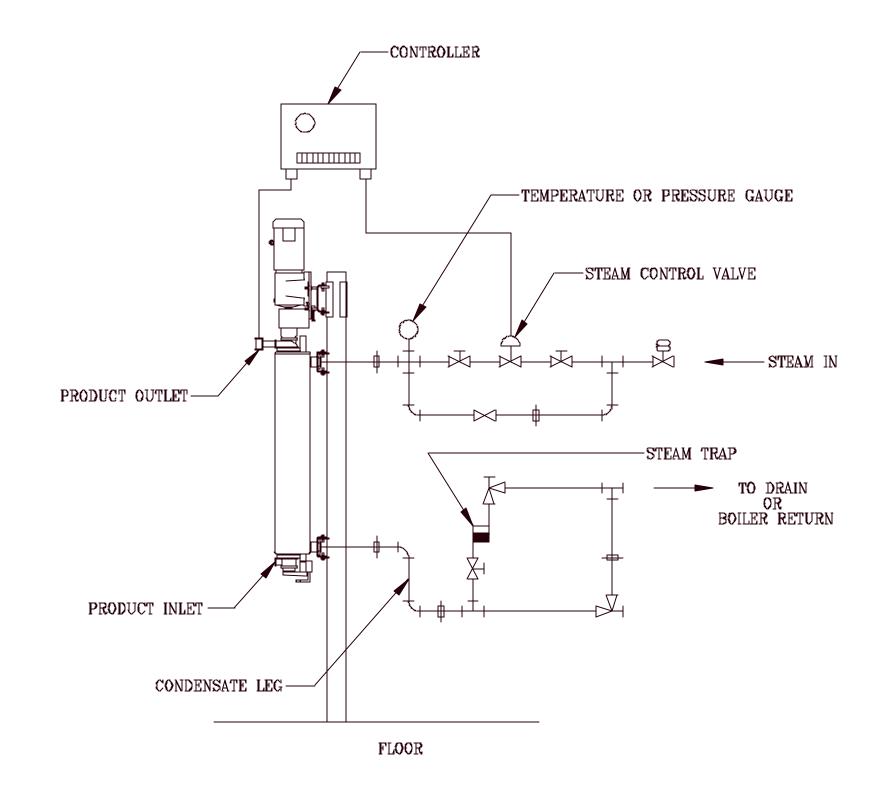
Typical Steam Heat System Configuration Backside of Figure 5-10 -- 11 x 17 foldout drawing
